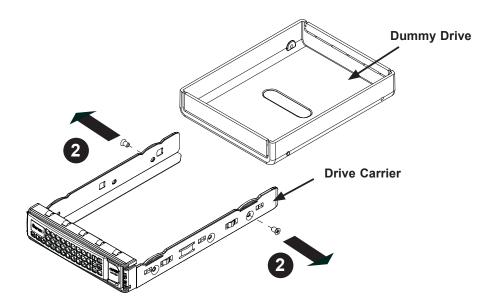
Removing a Dummy Drive from the Drive Carrier
